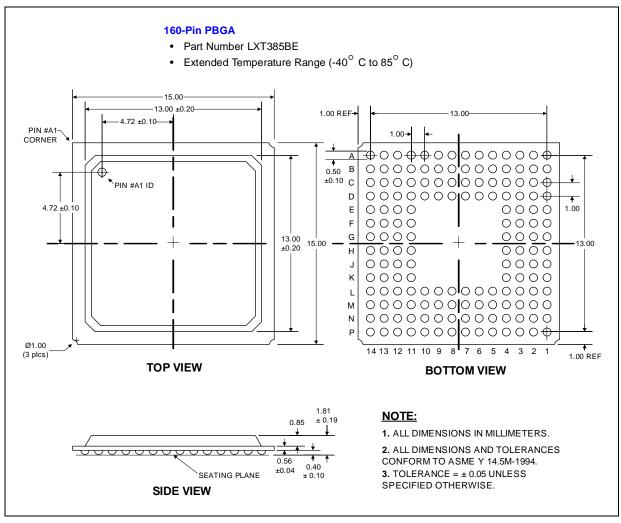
Dimensions for 160-Ball Plastic Ball Grid Array (BGA)
